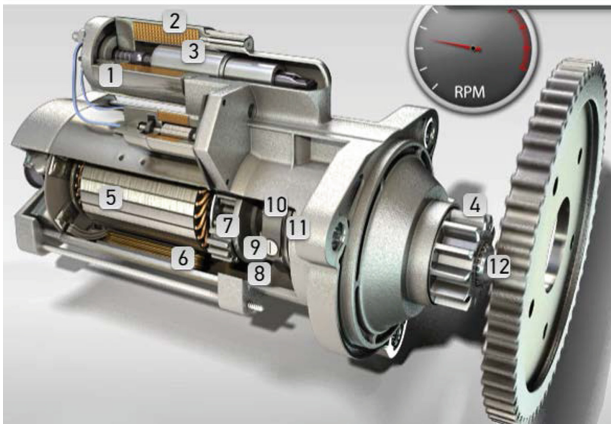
Electric starter motor for internal combustion engine [1]: 1-Starter solenoid, 2-Winding, 3-Through-bolts, 4-Pinion, 5-Armature, 6- Winding, 7-Planetary gear, 8- Ring gear, 9- Planetary gearset, 10-Engaging lever, 11- Carrier, 12-Armature shaft
